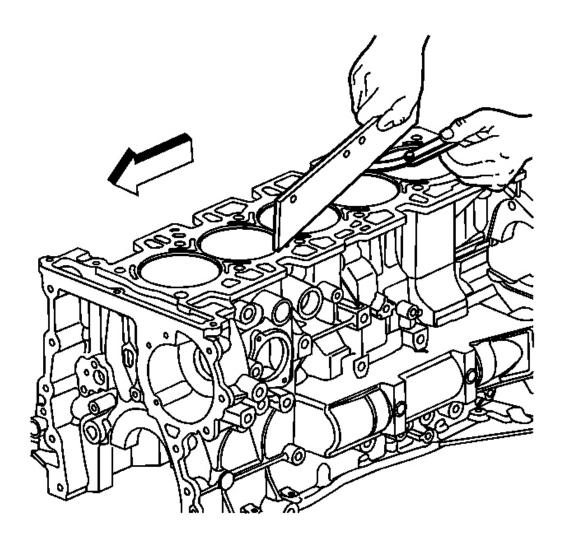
Checking Deck Surface For Flatness Courtesy of GENERAL MOTORS CORP.
